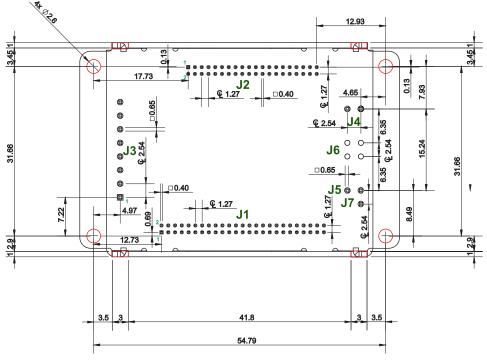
iMOTIONCUBE CAN PCB Footprint
